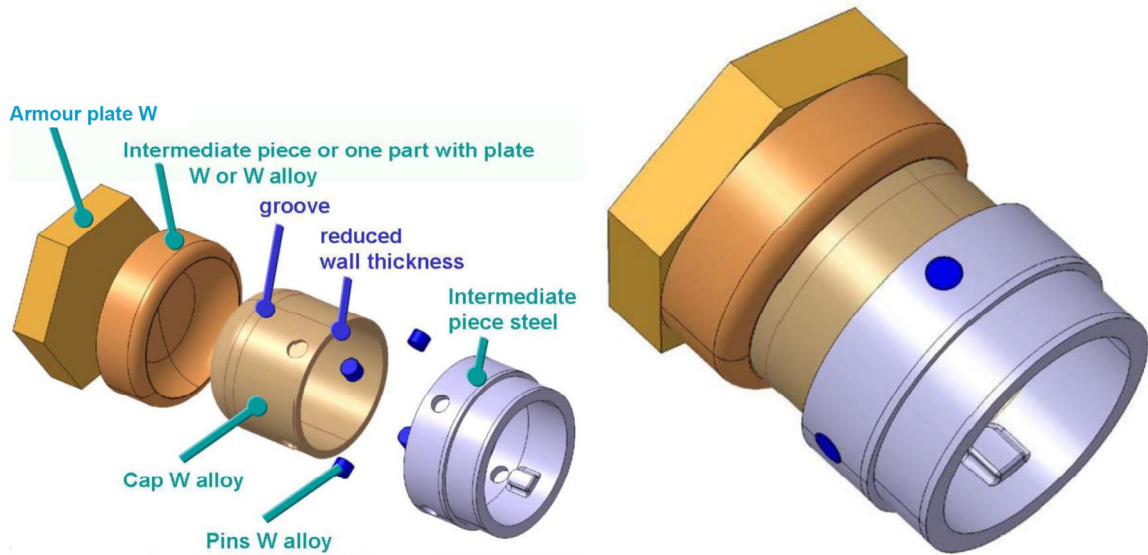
Proposed design of reduced stress HEMJ. Exploded (left) and assembled (right). [8]
